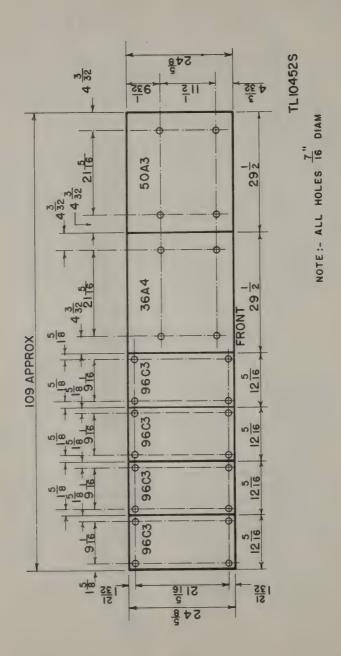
Modulator type 50A3 and associated equipment, mounting dimensions.
